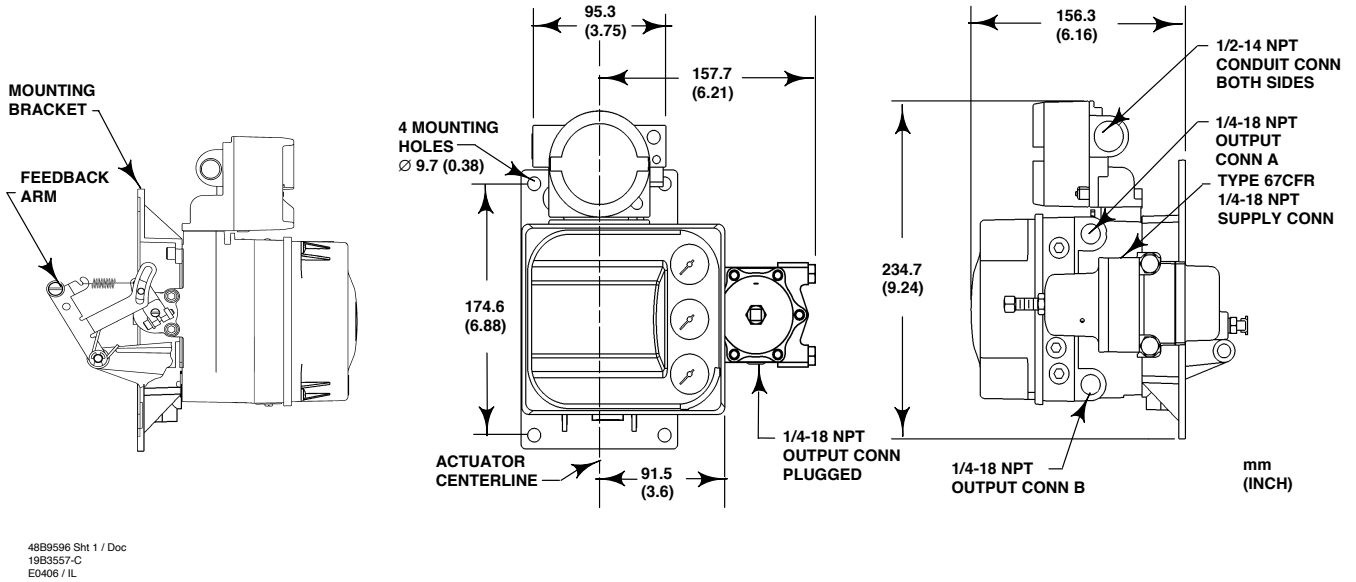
Dimensions for Type DVC6020 Digital Valve Controller with Integrally Mounted Filter Regulator
